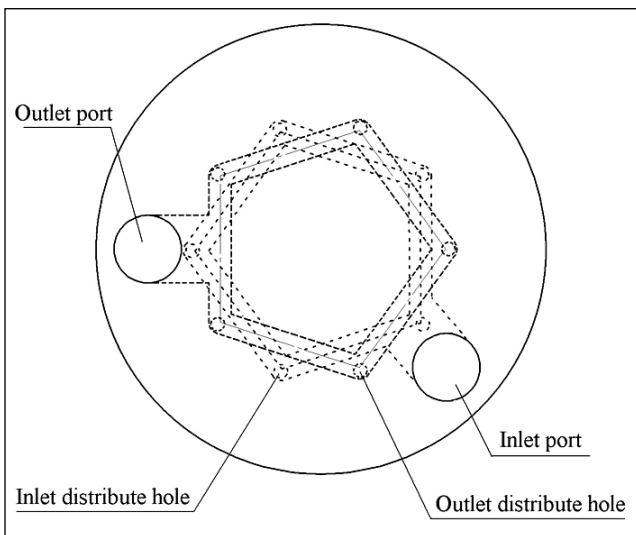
Location of Inlet and Outlet distribute holes on the port plates A and B
